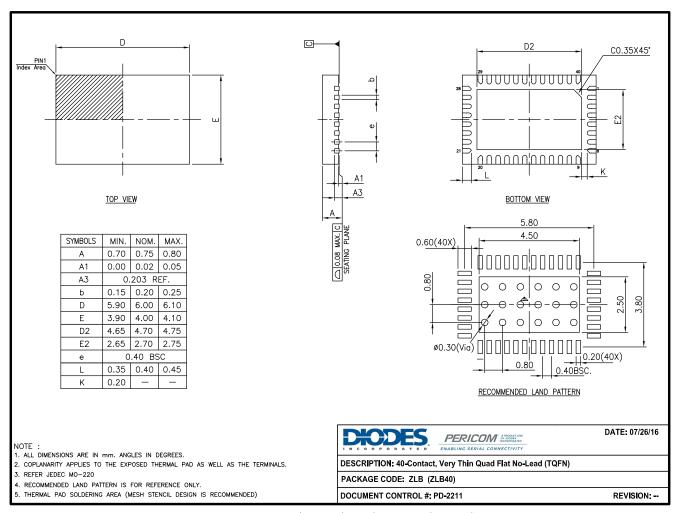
PI3DPX1205A(40-pin) Package Mechanical Dimension
